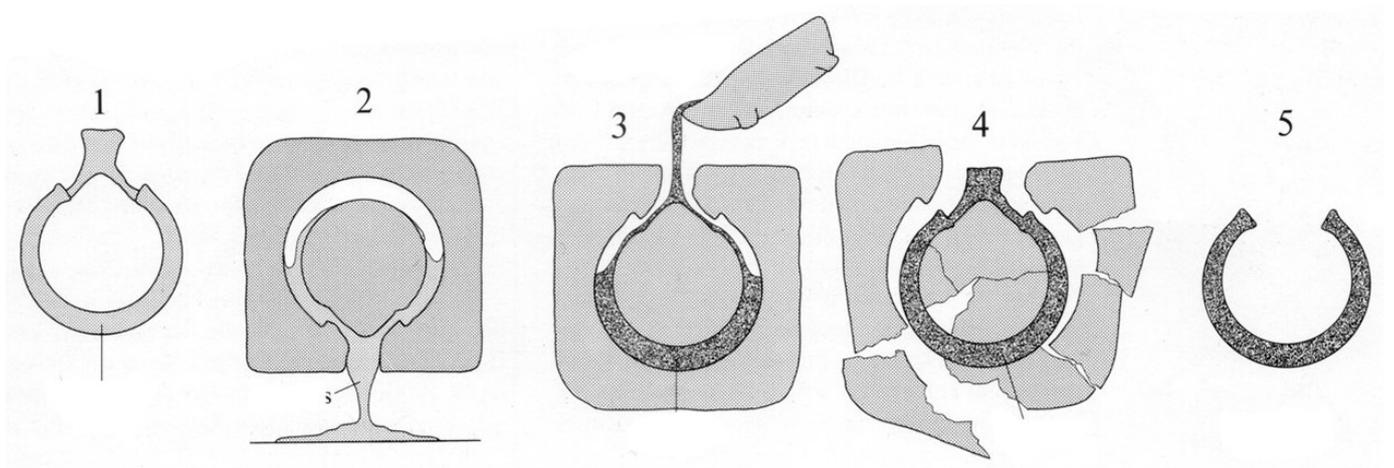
Schematic drawings of the lost-wax casting process. (1) Wax model with casting channels and casting funnel; (2) clay investment (casting mold) and removal of melted wax after drying; (3) filling of the remaining cavity with molten metal; (4) breaking of the clay mold jacket after cooling; (5) raw cast product after the removal of channels and casting funnel (after Wübbenhorst and Engels 1989, p. 14, Fig. 7).
